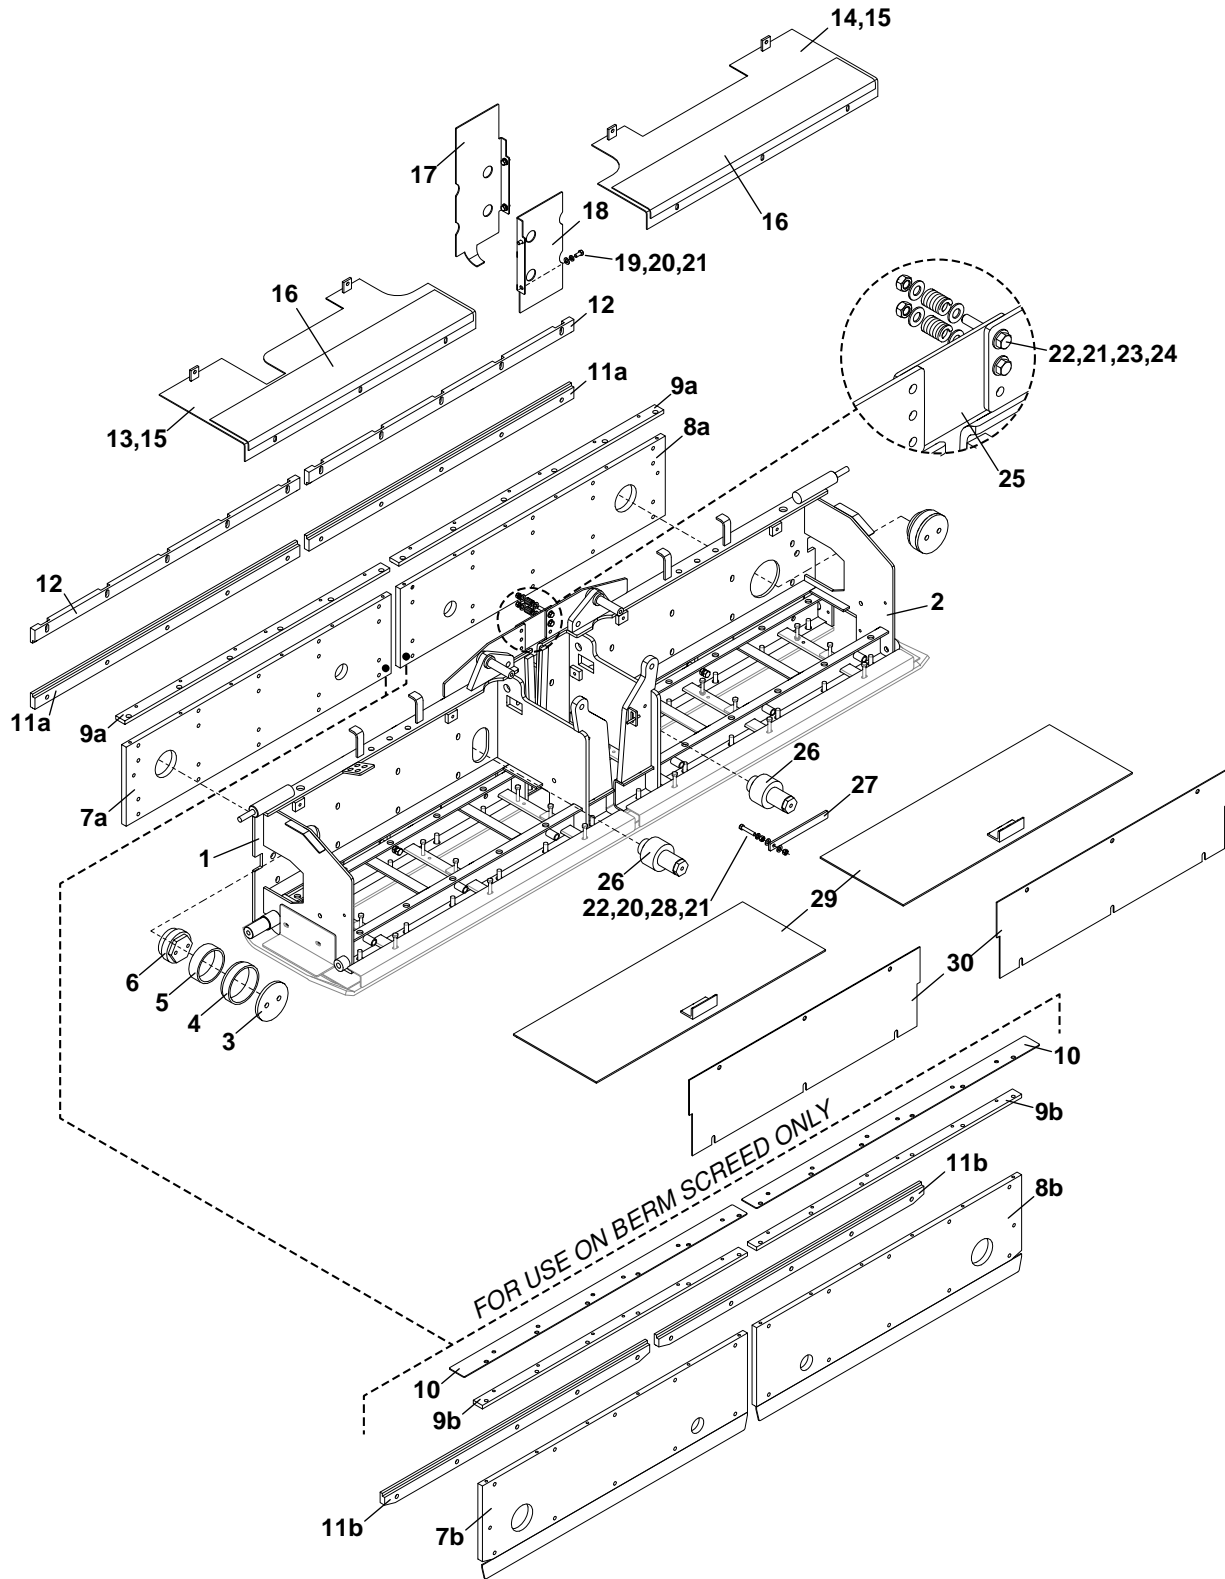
HD Screed Frame Assembly (1 of 2)
